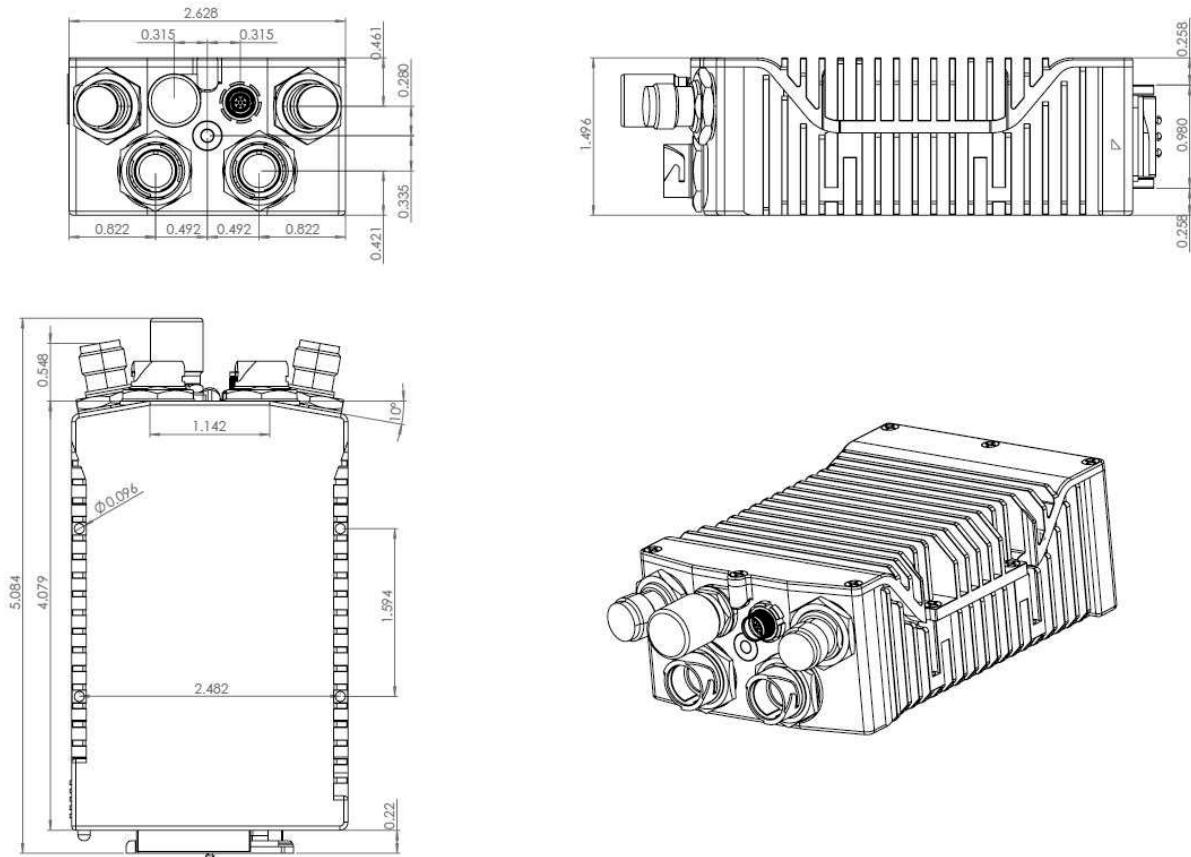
SC4200 Mechanical Drawing (top) and Mounting Pattern (bottom)
